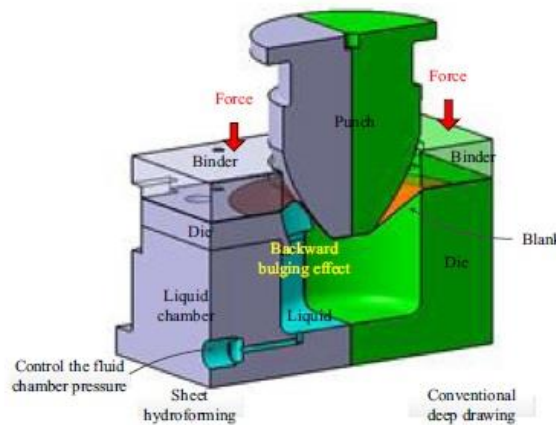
Showing comparing between hydro-mechanical (gray) deep drawing and traditional deep.
